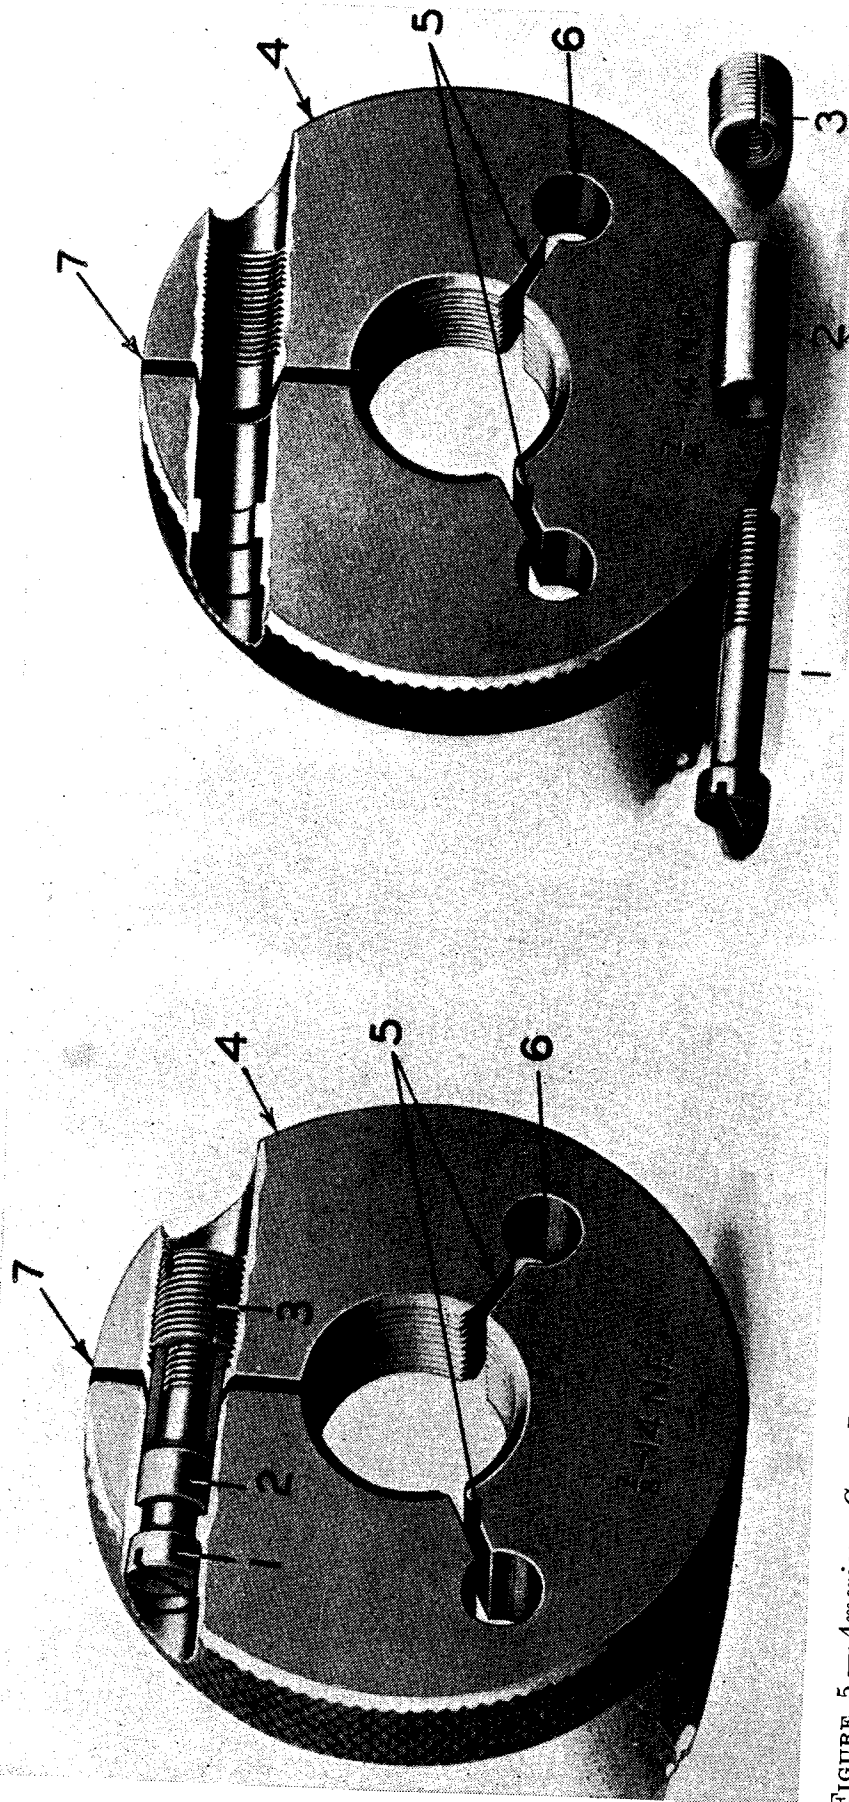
American Gage Design Standard thread ring gage locking device, details of construction, range No. 0 to 5½ inches, inclusive.
